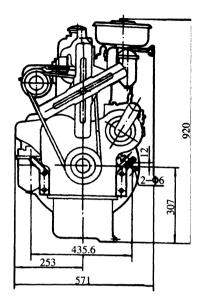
Outline drawing for 495G10, 495G14 diesel engine
